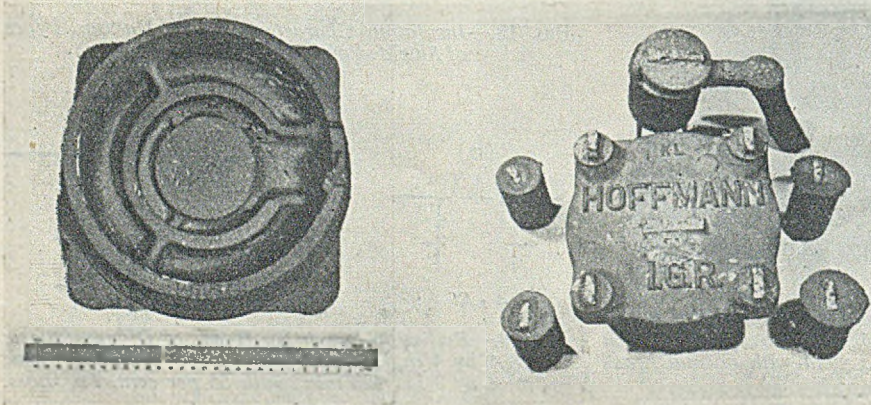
Views of a Hoffman Cover Casting, about 10 in. square; the R.H. Illustration includes the Runner and Knock-off Heads.
